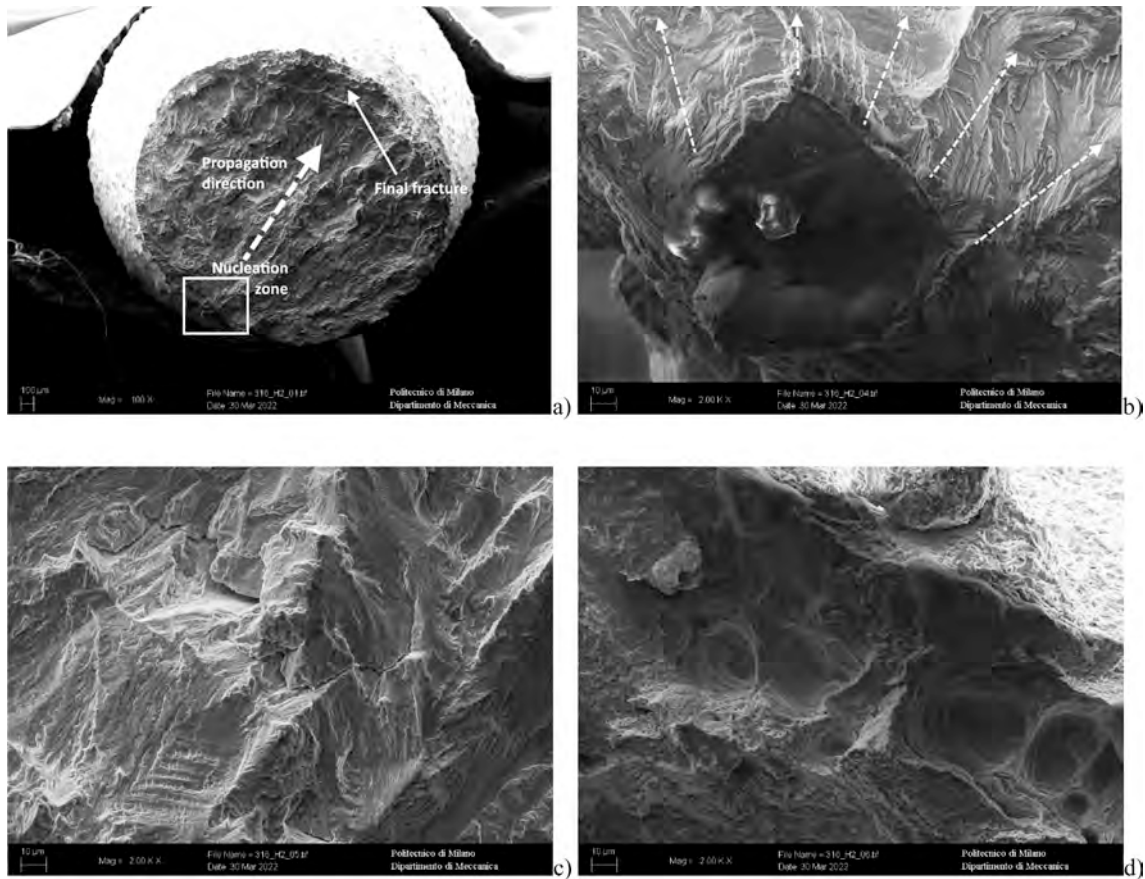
Fracture surface analysis of specimen HCF2 - (a) fracture surface, (b) nucleation zone characterized by the presence of an un-melted zone, (c) propagation zone, (d) final fracture.
